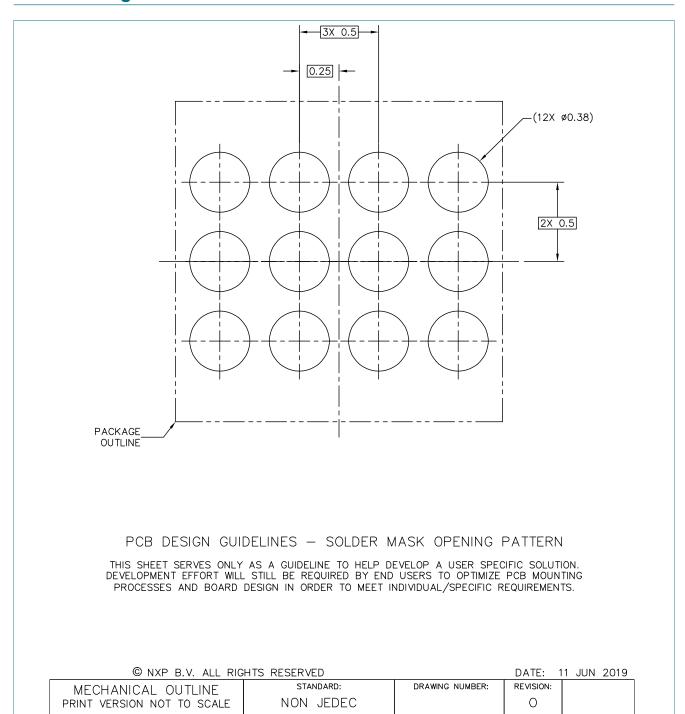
Reflow soldering footprint part1 for WLCSP12 (SOT1999-1)
